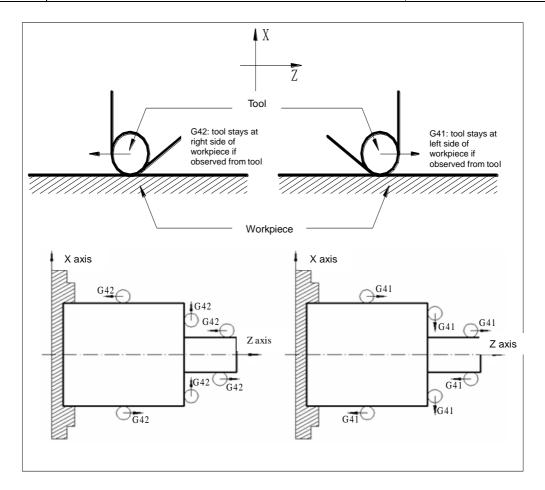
Tool Nose Radius Compensation in Rear Tool Apron Coordination System
